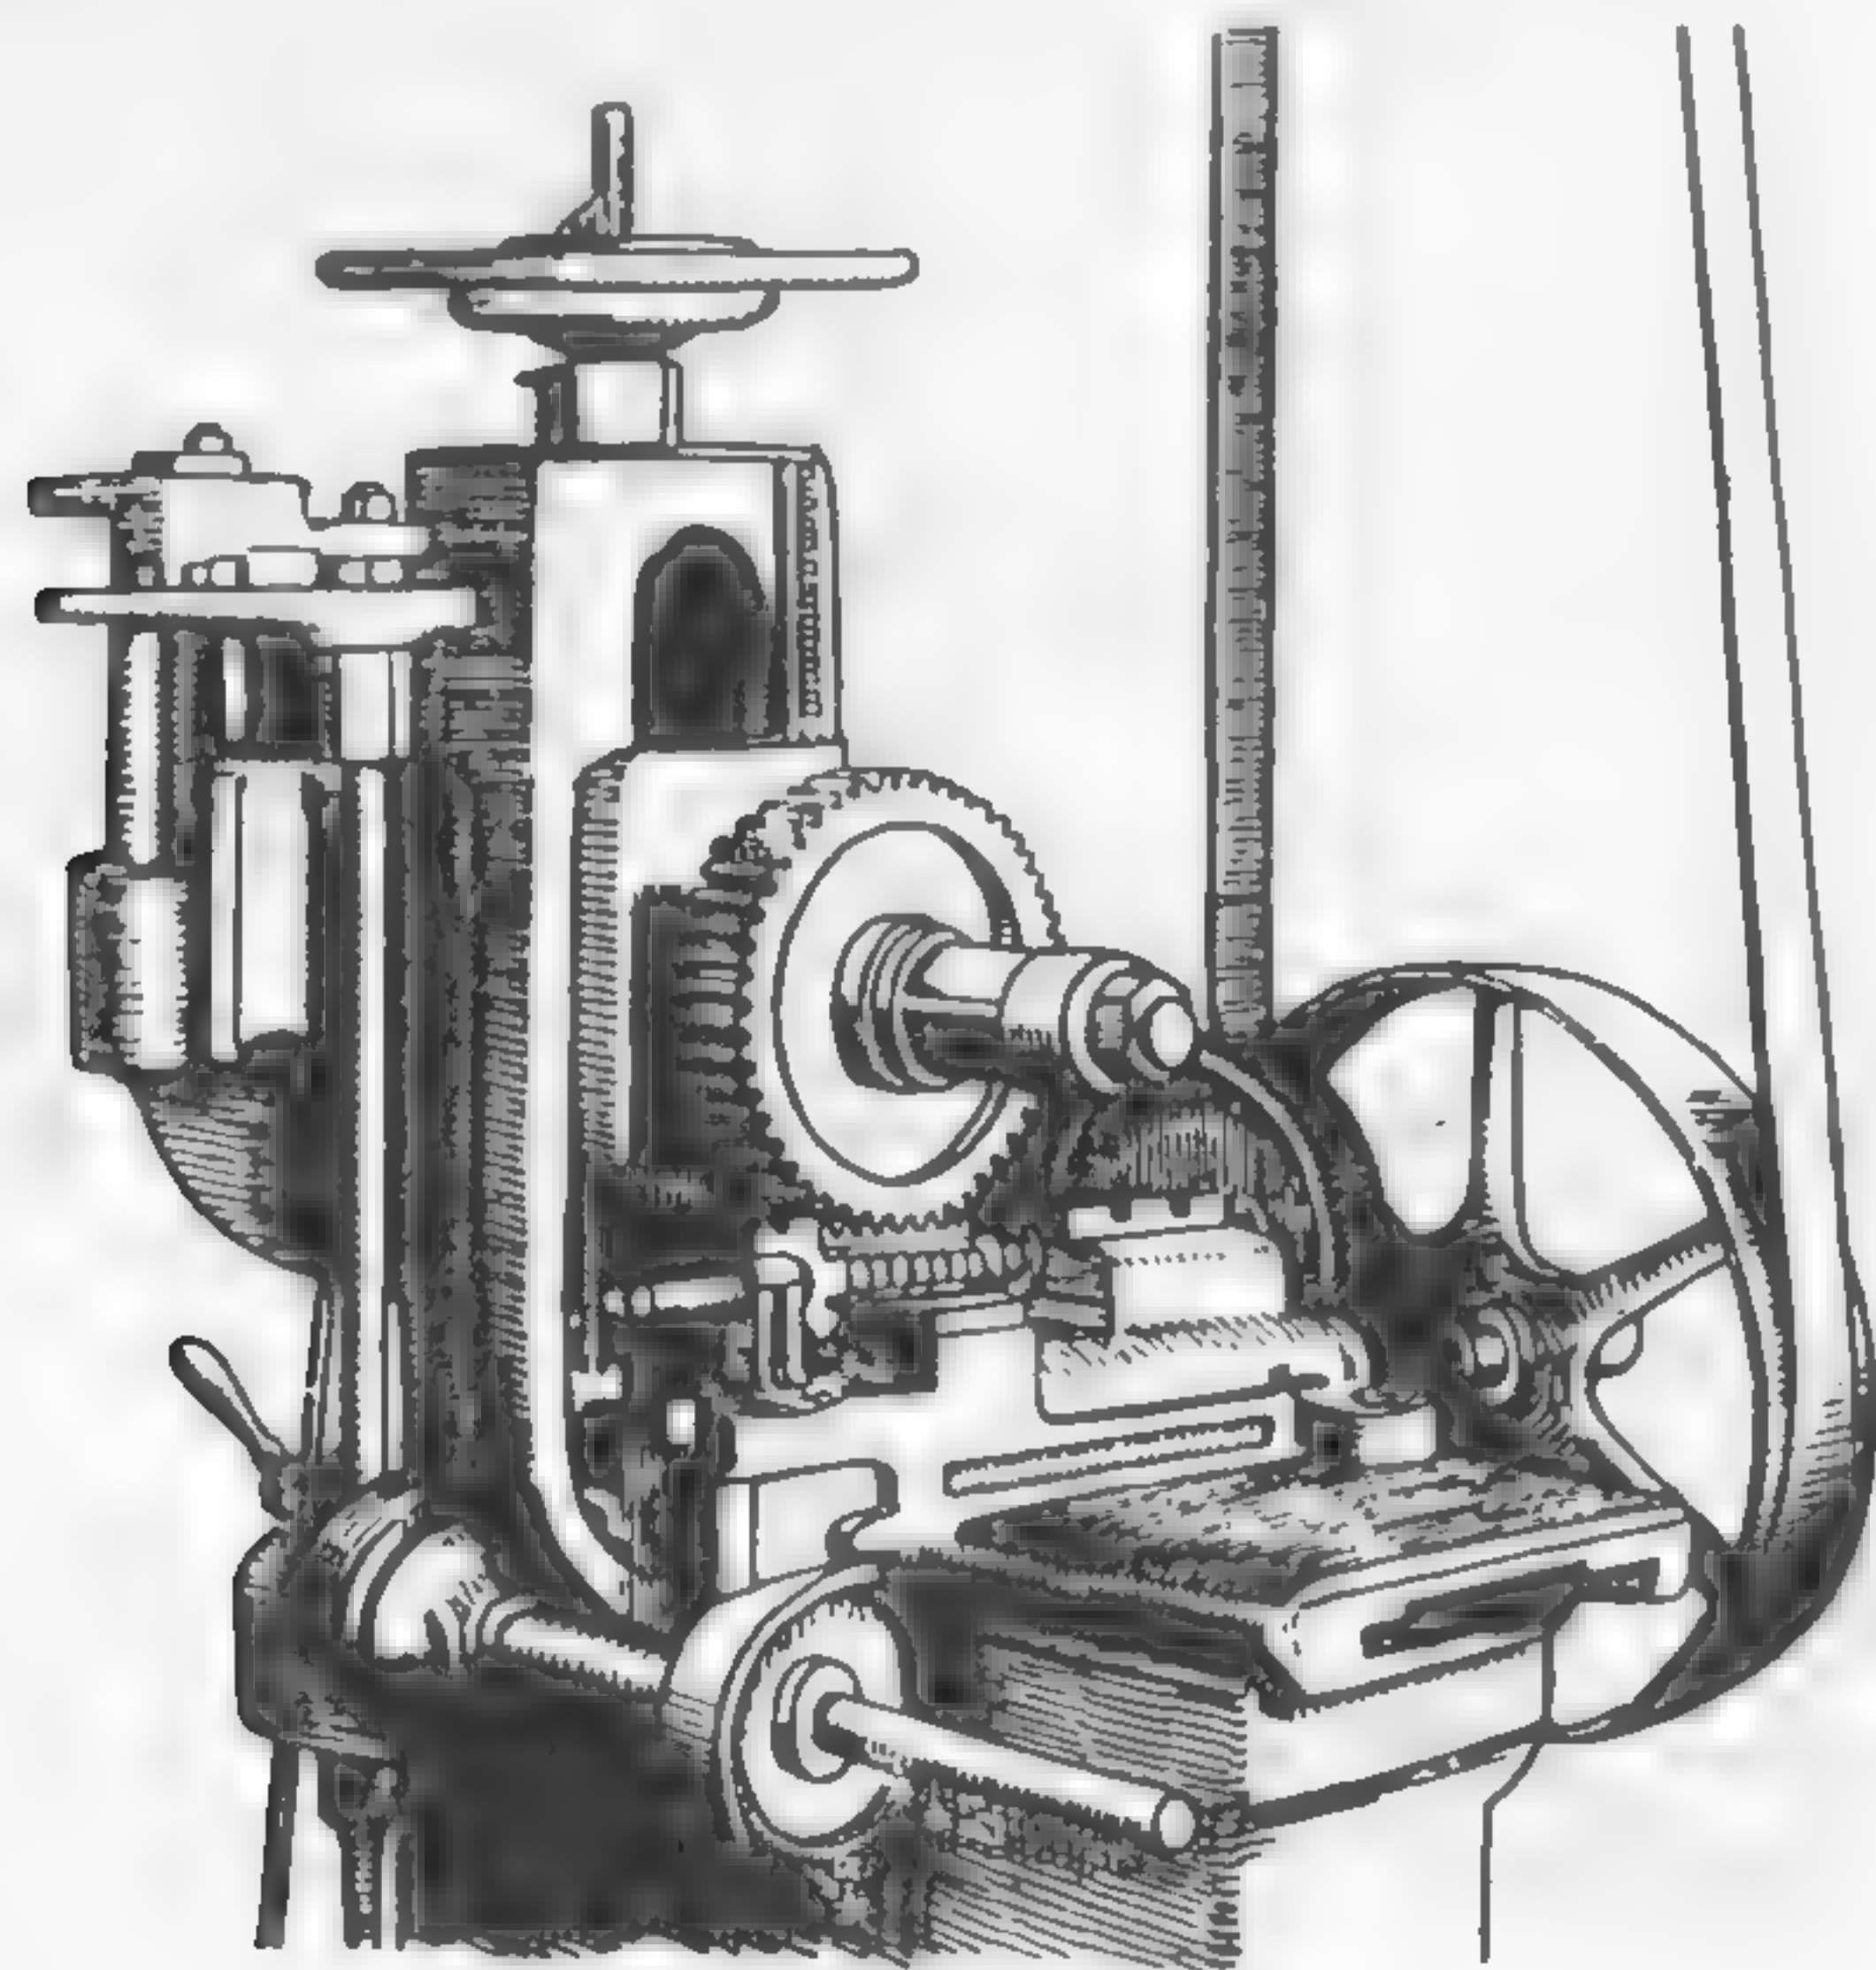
JUENGST GEAR-HOBGING MACHINE, 1893 (*Inst. Mech. Eng.*)
